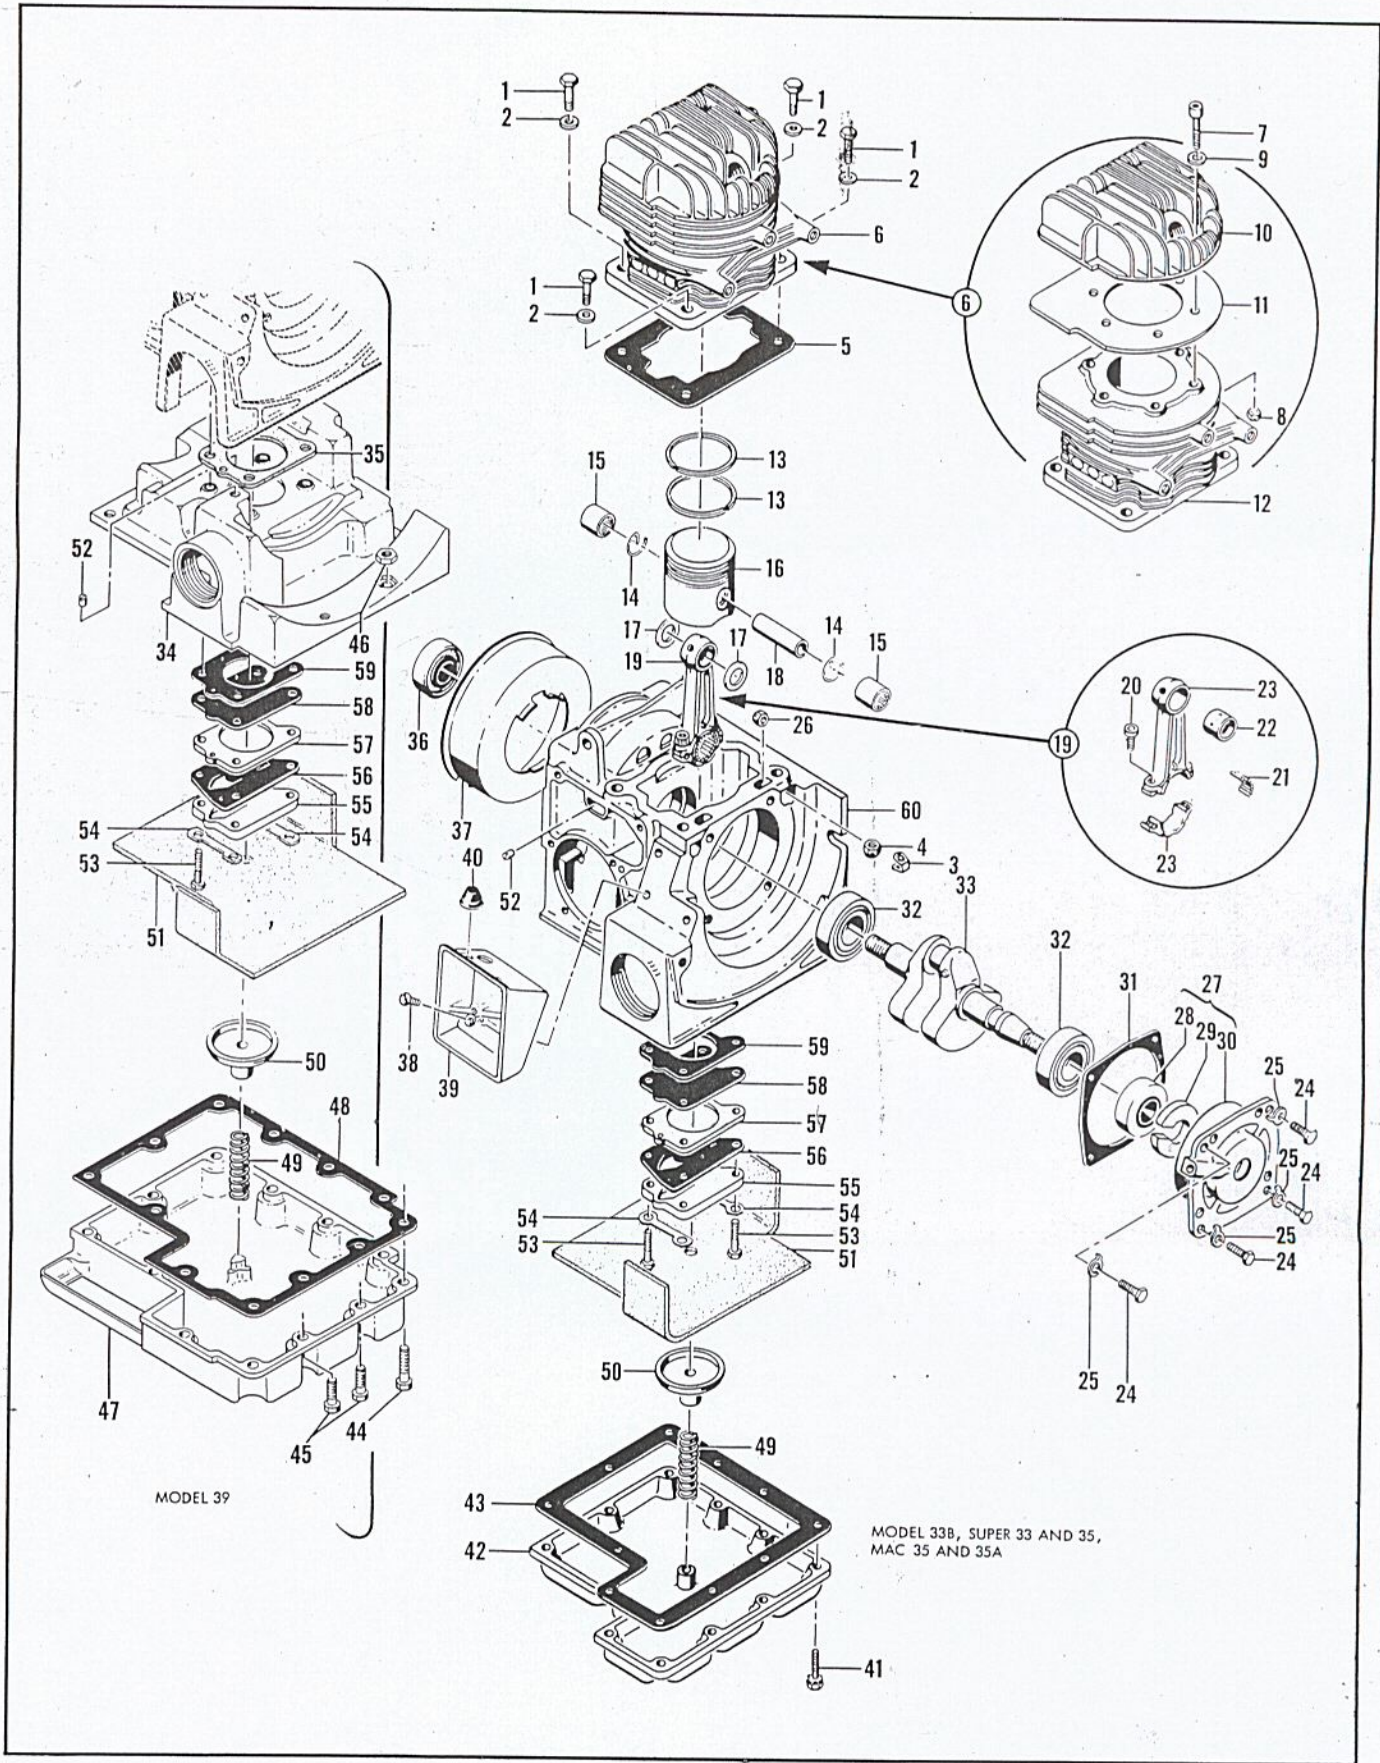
Crankcase, Crankshaft, Cylinder and Piston
